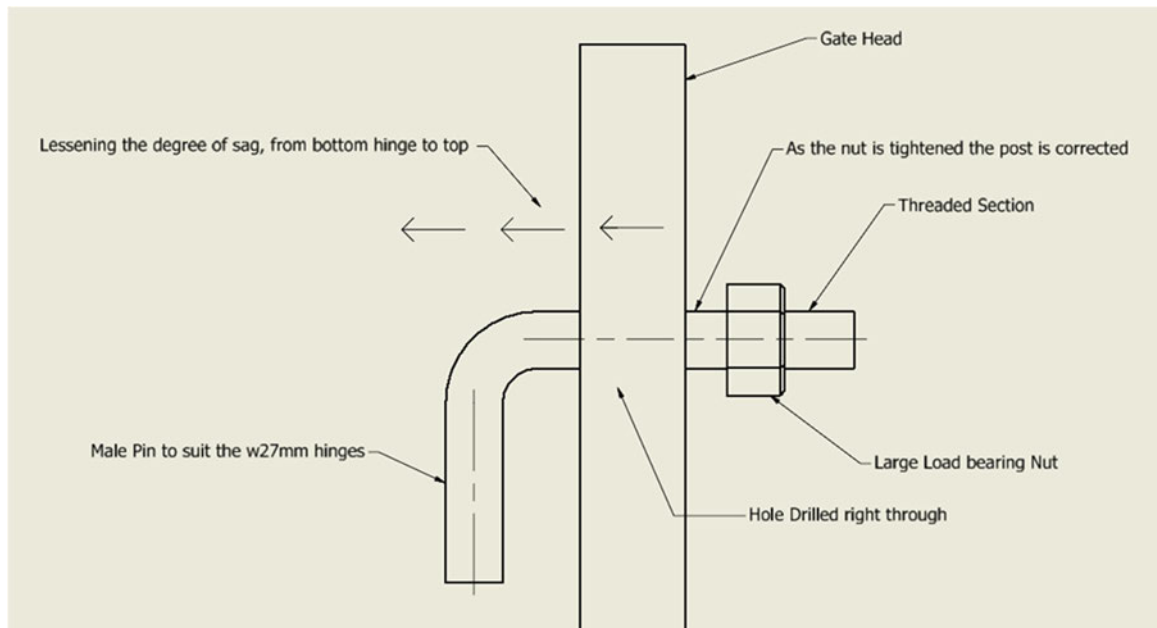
Prototype Design - Top hinge, L-shaped tensioner pin
